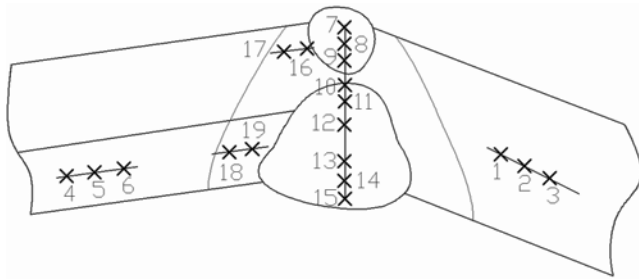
Hardness measurement points on the cross-section of welded joint
